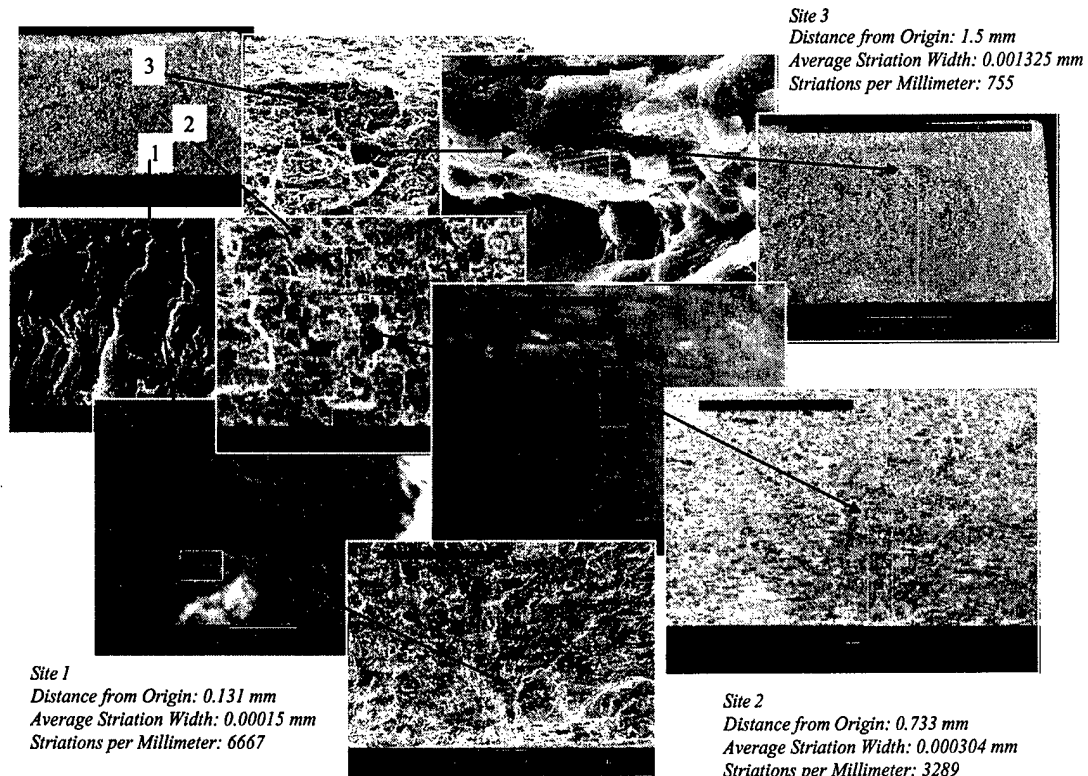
Fracture Surface of Specimen 43-2 Showing Fatigue Striations
